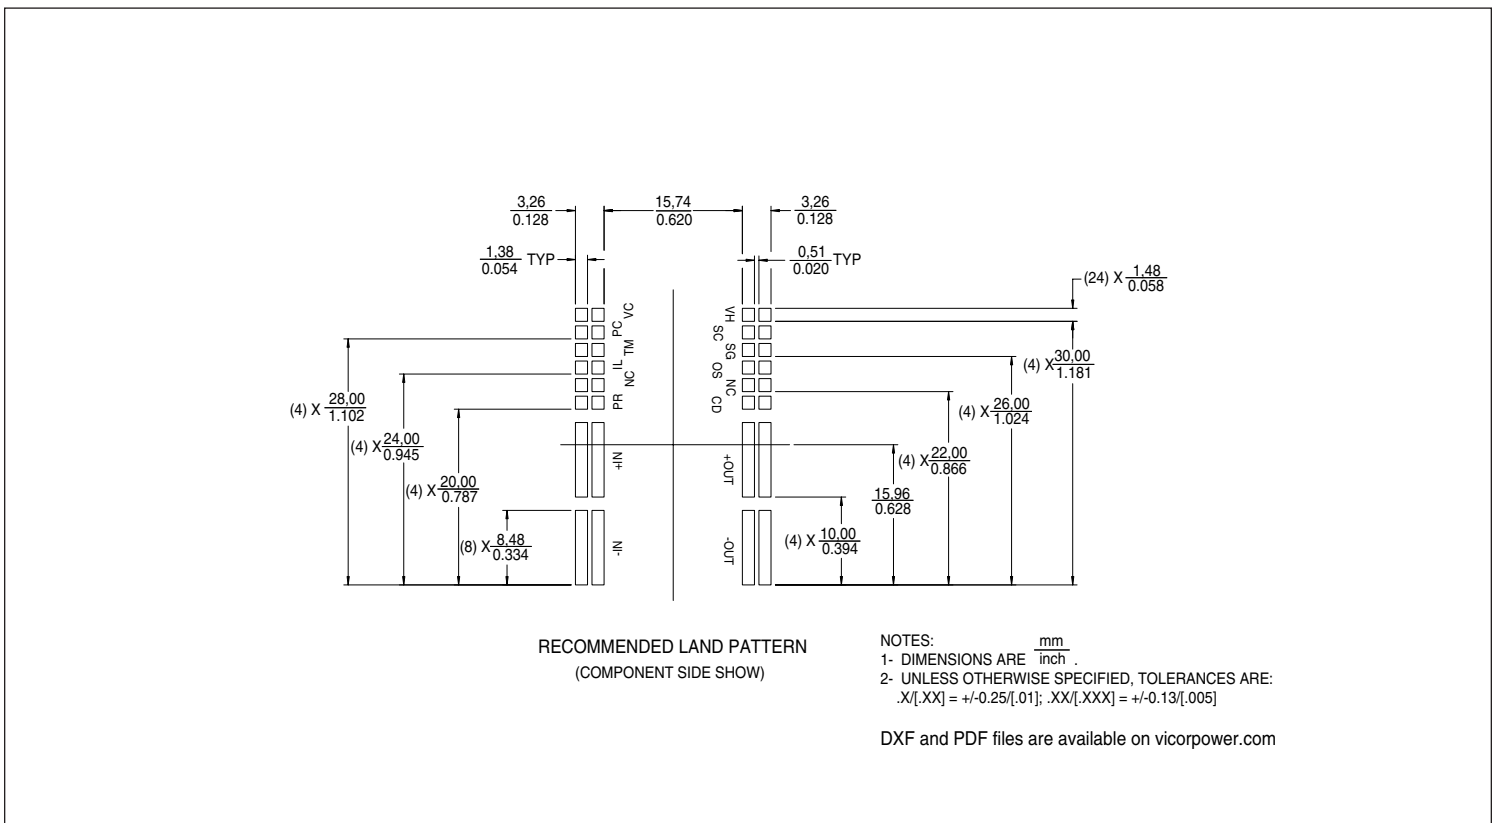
PRM J-Lead PCB land layout information; Onboard mounting
